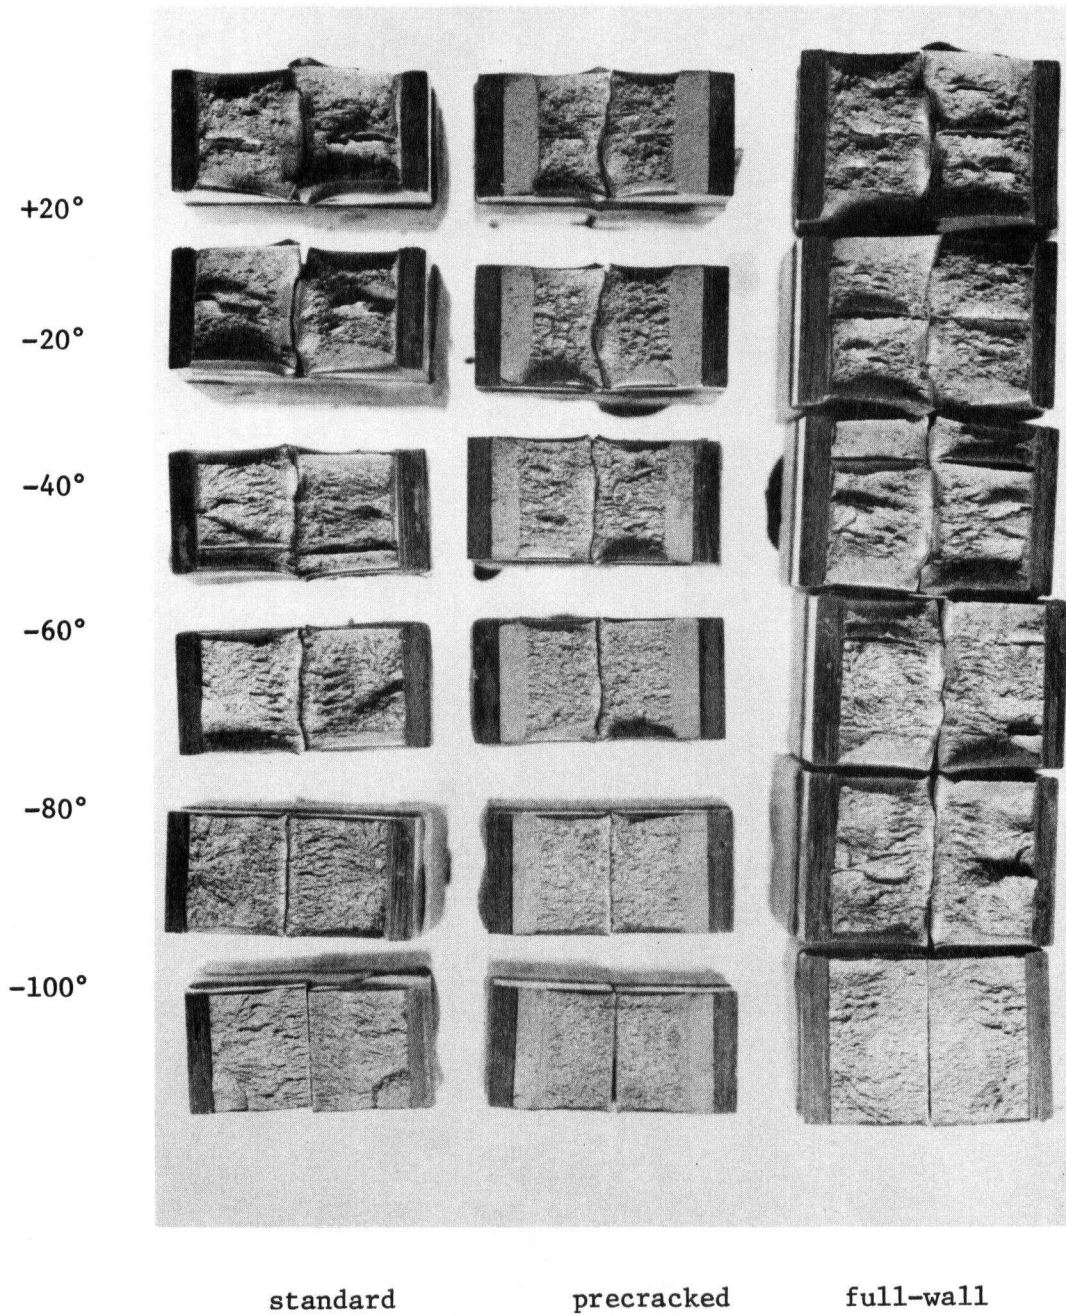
AF-2 steel fracture surfaces, crack parallel to pipe axis.
